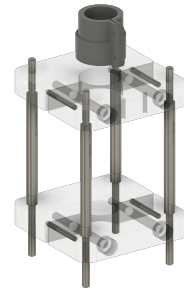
Rendering of the redesigned room-temperature mounting plates for the motor and vacuum feedthrough.
